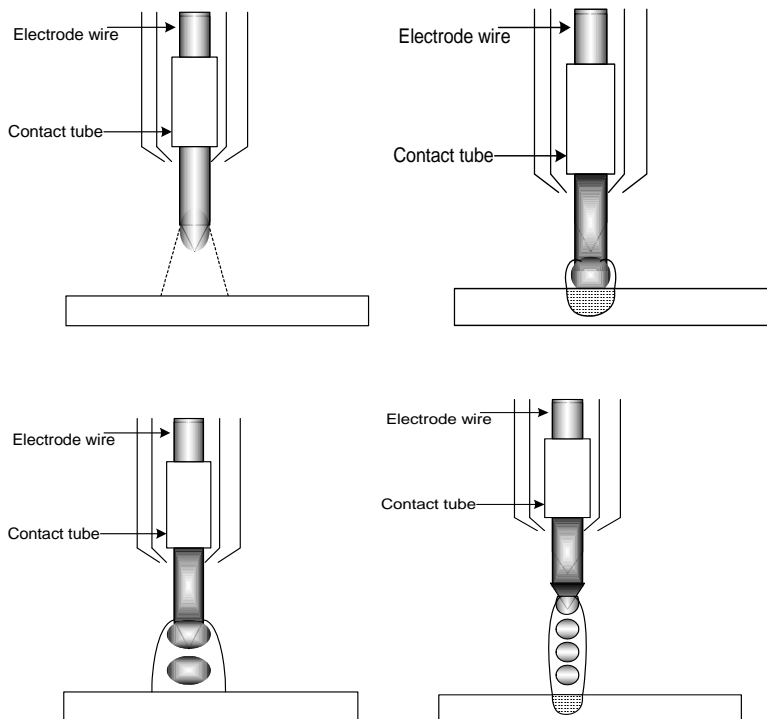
Schematic of modes of metal transfer in MIG welding a) typical set, b) short circuiting transfer, c) globular transfer, and c) spray transfer
